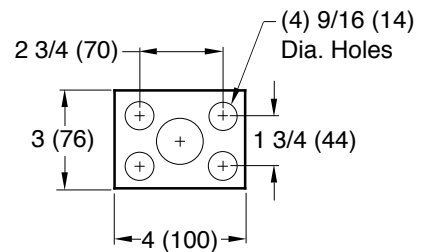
DETAIL OF COLLAR AND YOKE ASSEMBLY
